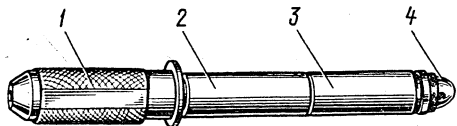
Tool 02.7853.9500 for Pressing the Piston Pin into Piston and Connecting Rod:
